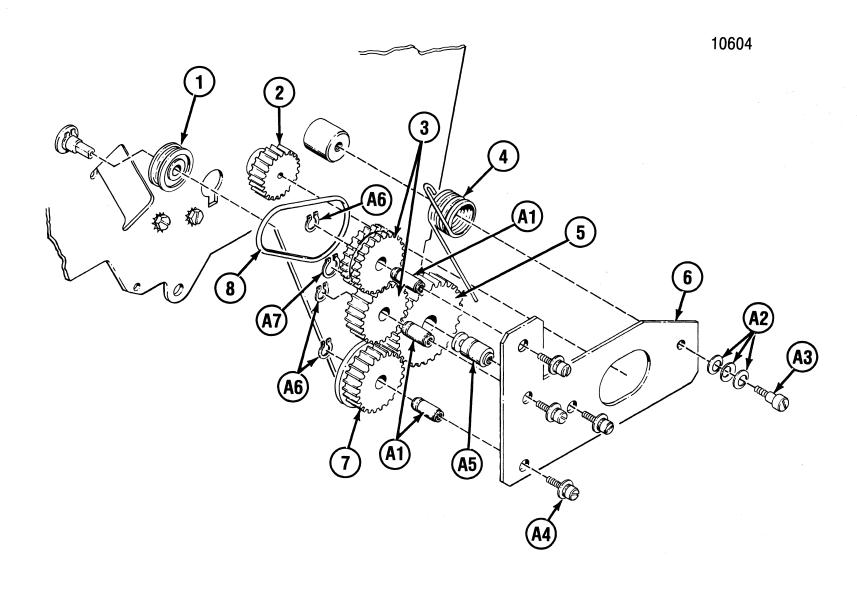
Sheet Feeder, Power Takeoff Assembly
